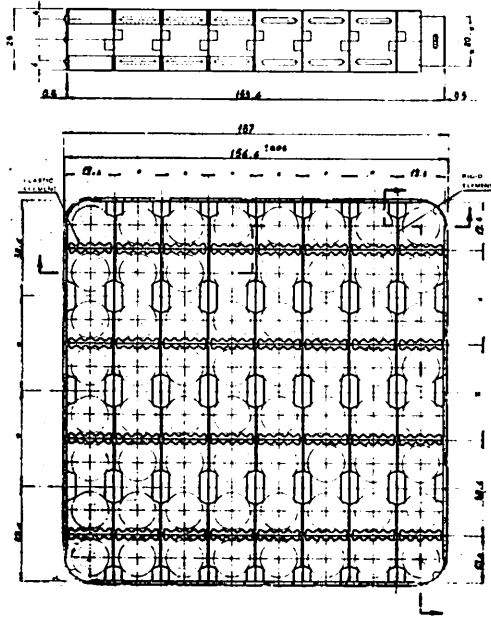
High pressing type spacer T.I.G. system welded.
